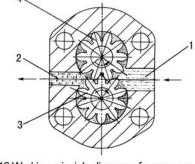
Working principle diagram of gear pump 1.Suck oil cavity 2.Pressure oil cavity 3.Driving gear 4.Driven gear
